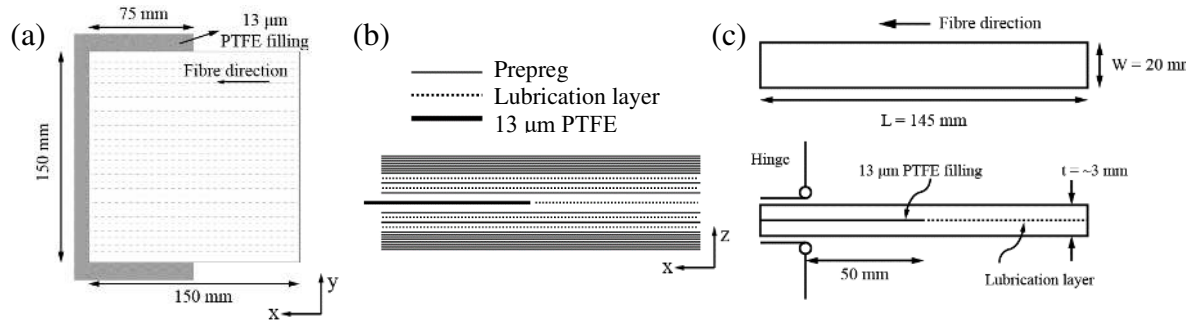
Schematic of DCB specimens and their fabrication method: (a) specimen top view before cutting, (b) cross-section, (c) DCB specimen dimensions after cutting.
